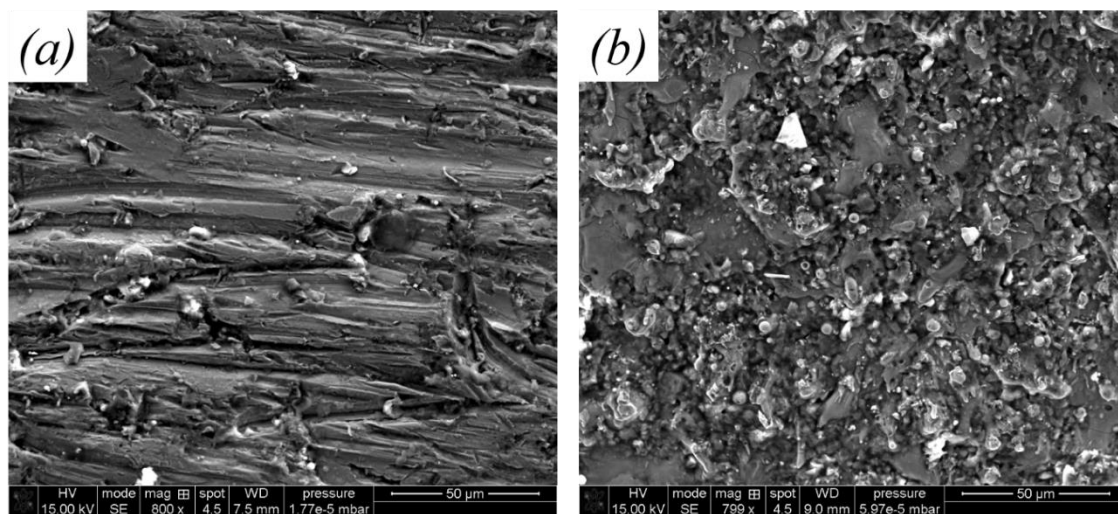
6 Surface morphology of the machined edges of Ti-3Al-2.5V
